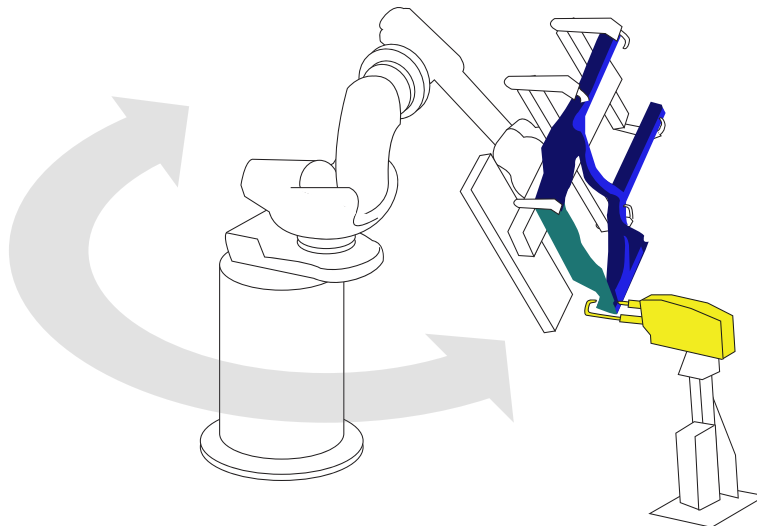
Transporter robot holding the entire work-piece and manipulating it to the welding gun placed on the line's sideways. The work-piece that the robot holds and the static yellow welding gun are highlighted in the picture.
